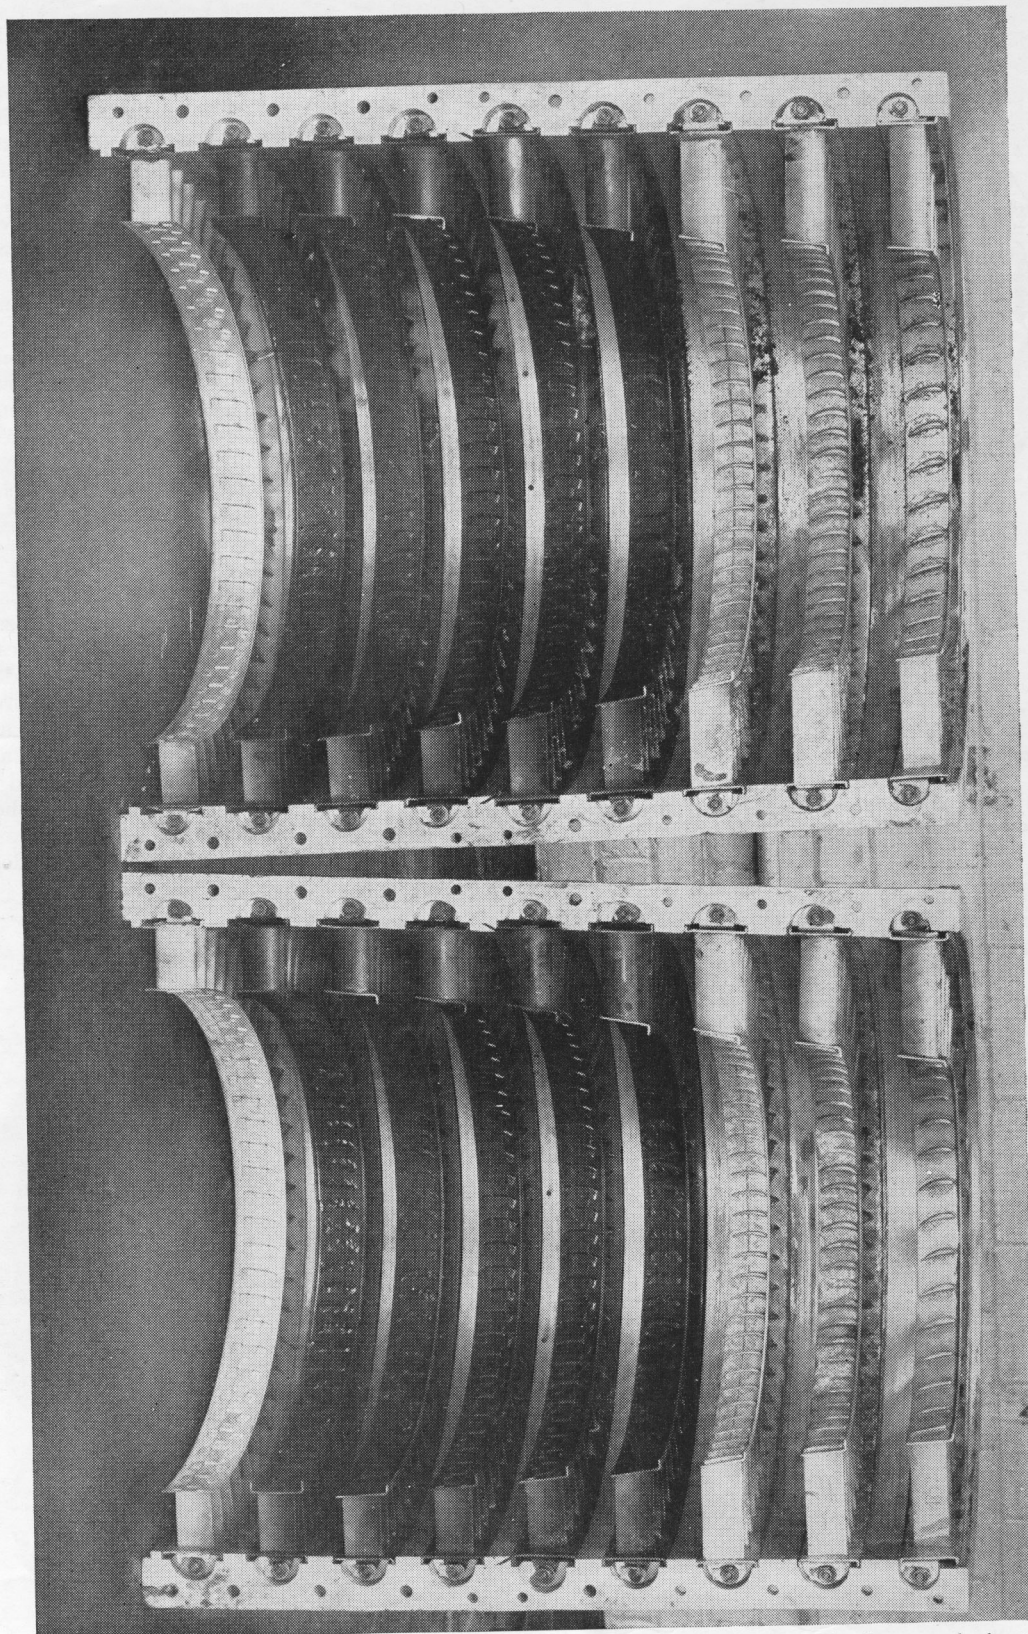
The stator casting top and bottom halves are bolted together longitudinally with a flange on the front end bolting to intake casing, that on the aft end to the main casting. The light-colored blades are aluminum; the darker are enameled mild steel.
